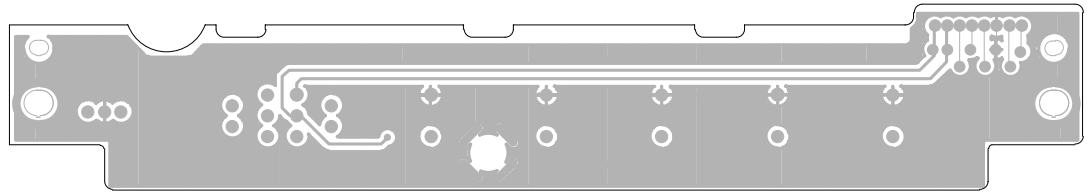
U002 Switch PC Board (Bottom side)
